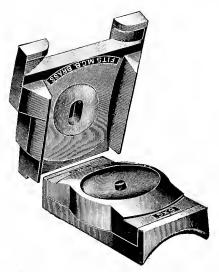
A. B. C. Journal Bearing and Wedge. A. B. C. Bearing Corporation.
